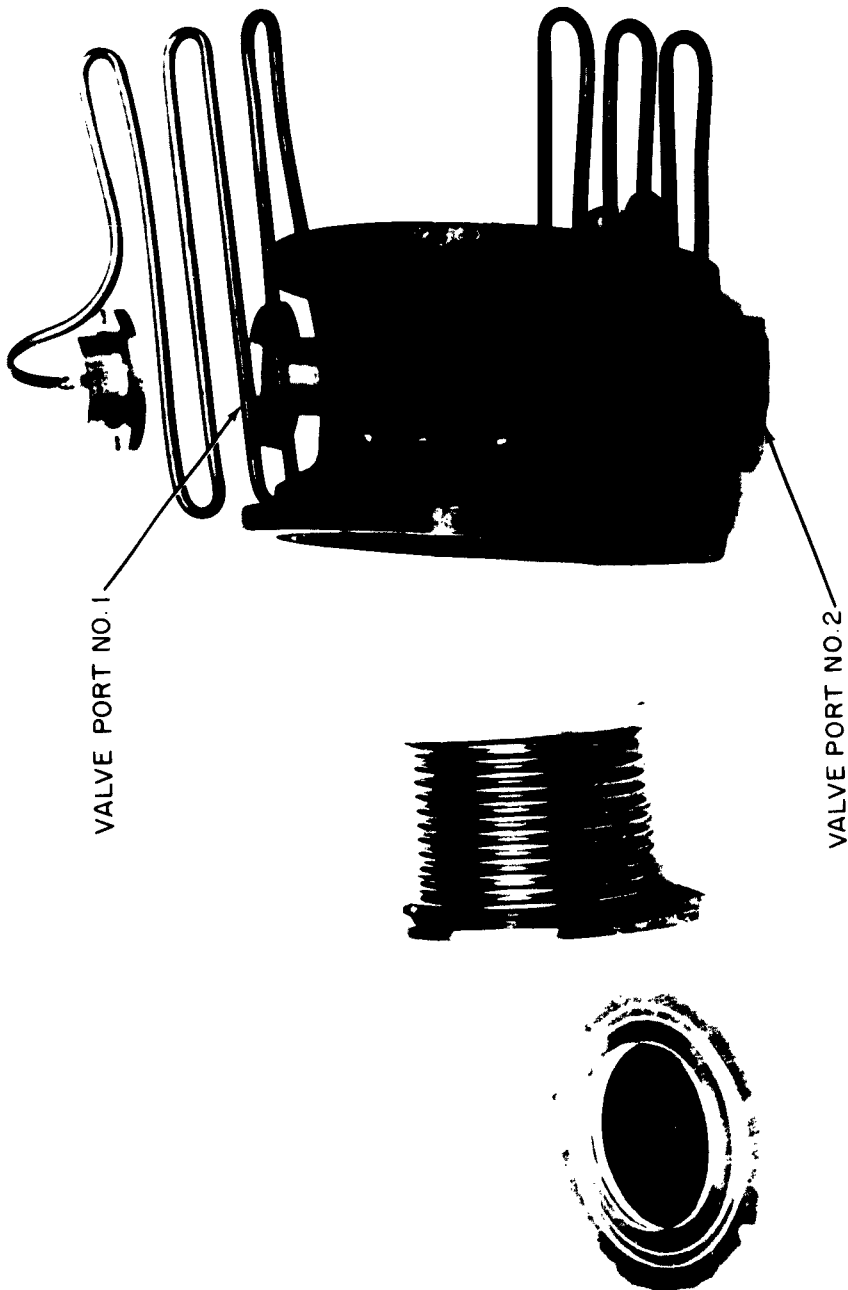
BELLOWS CHAMBER SHOWING BELLOWS, RUBBER DIAPHRAGM & SPACER READY FOR INSTALLATION
